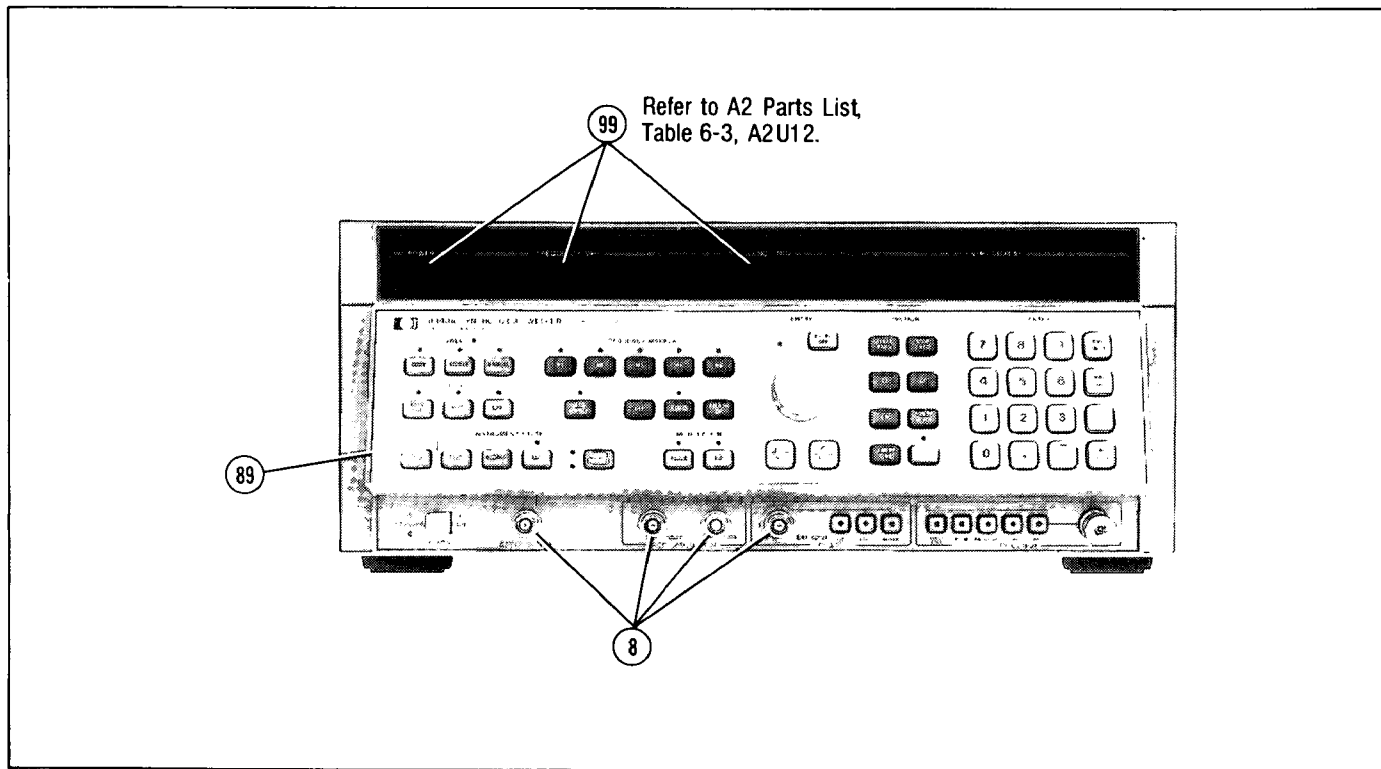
Miscellaneous Mechanical & Chassis Parts (3 of 9)
